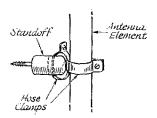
Suggested method of mounting radiator element without drilling holes in aluminum tubing.
